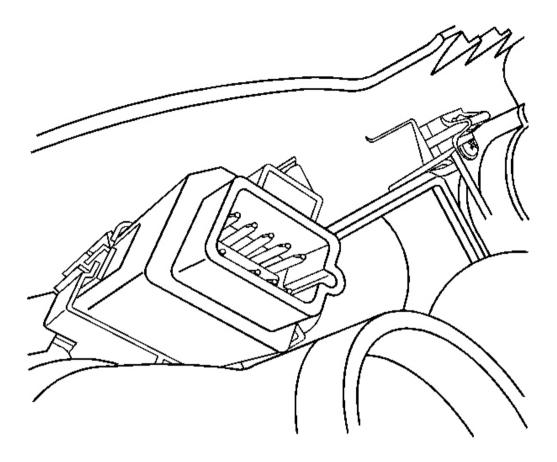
View Of Hazard & Turn Signal Flasher Courtesy of GENERAL MOTORS CORP.
